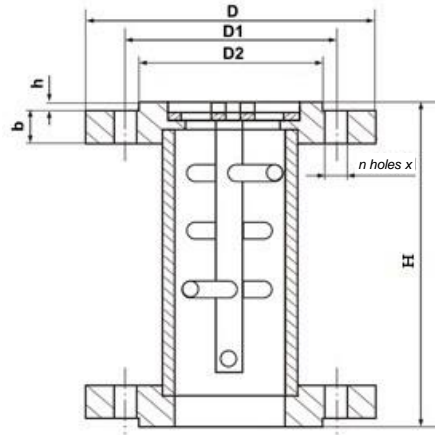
Dimensions and connection size of magnet filter for flanged rotameters
